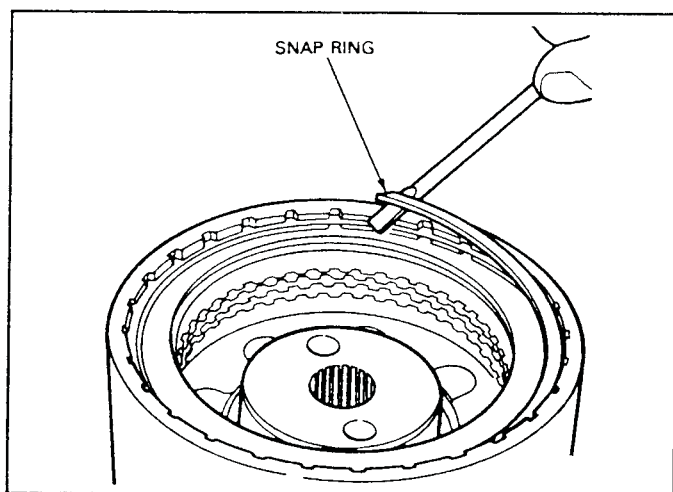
Removing Forward Clutch Pressure Plate Snap Ring
